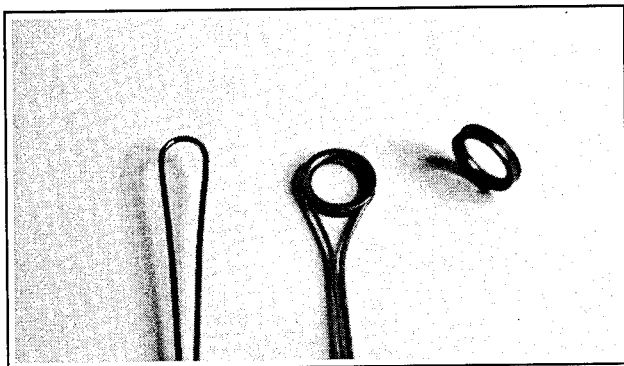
Deformed bail and bail eyelet to prevent deformation
